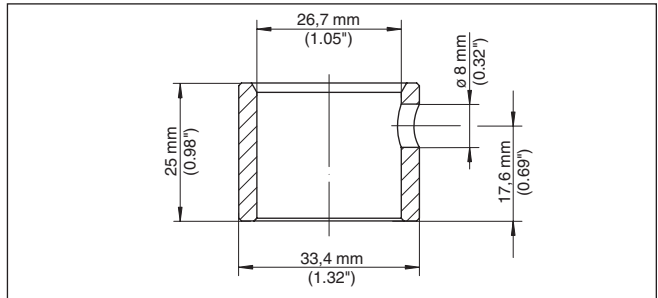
Dimensions of welded socket, PMC 1" VEGABAR 82
